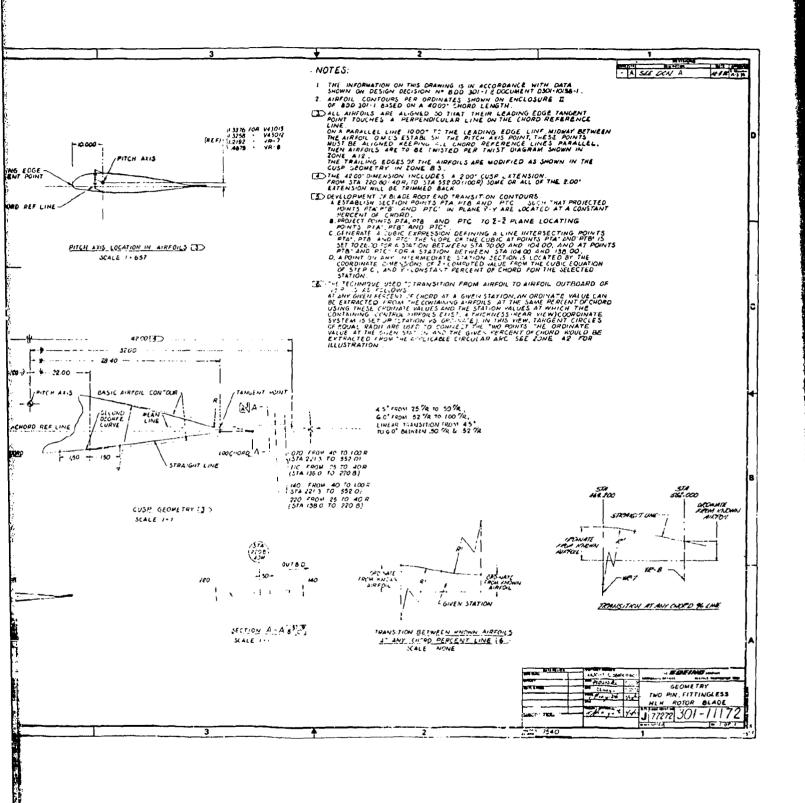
Geometry Two-Pin, Fittingless HLH Rotor Blade
